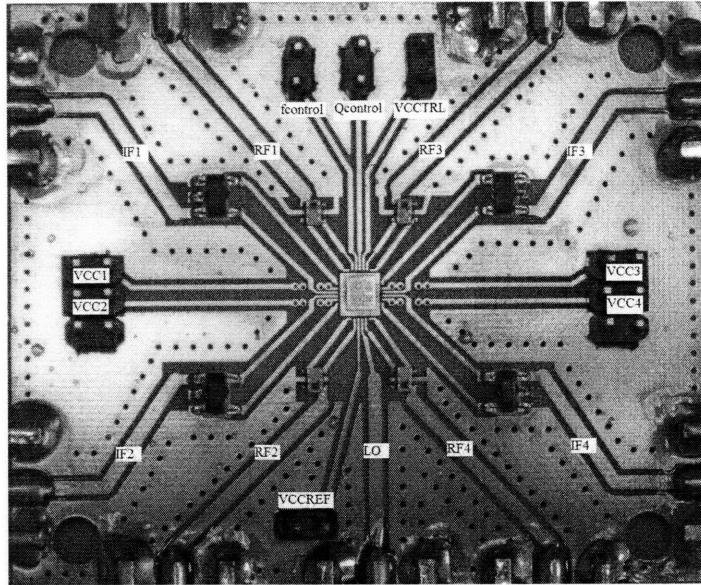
Test printed circuit board (PCB) with direct die attachment at center.
